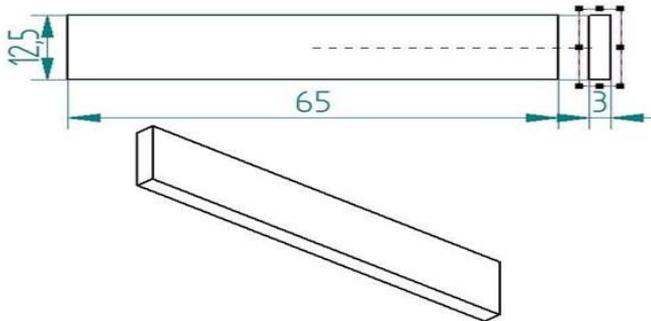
Geometry and Dimension of composite specimen for Impact Test
